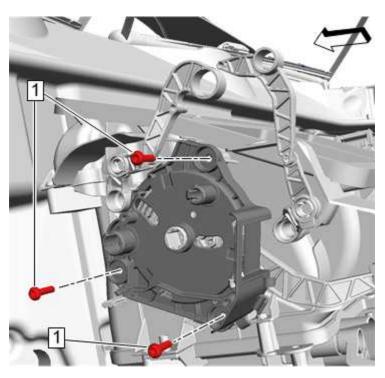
Mode Control Cam Actuator Mounting Plate Bolt Courtesy of GENERAL MOTORS COMPANY
